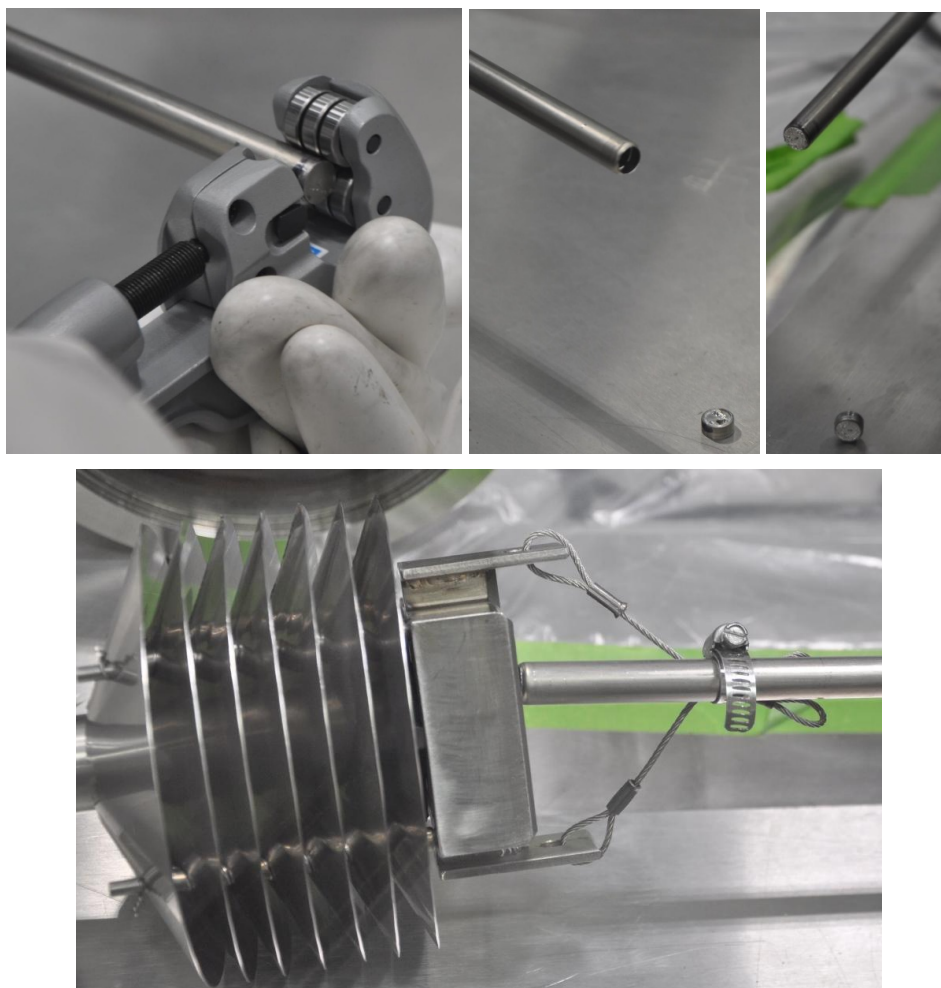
Cutting of Fermi-1 radial blanket element top-end piece (upper left and center), bottom end piece (upper right) and loading in retort (bottom).
